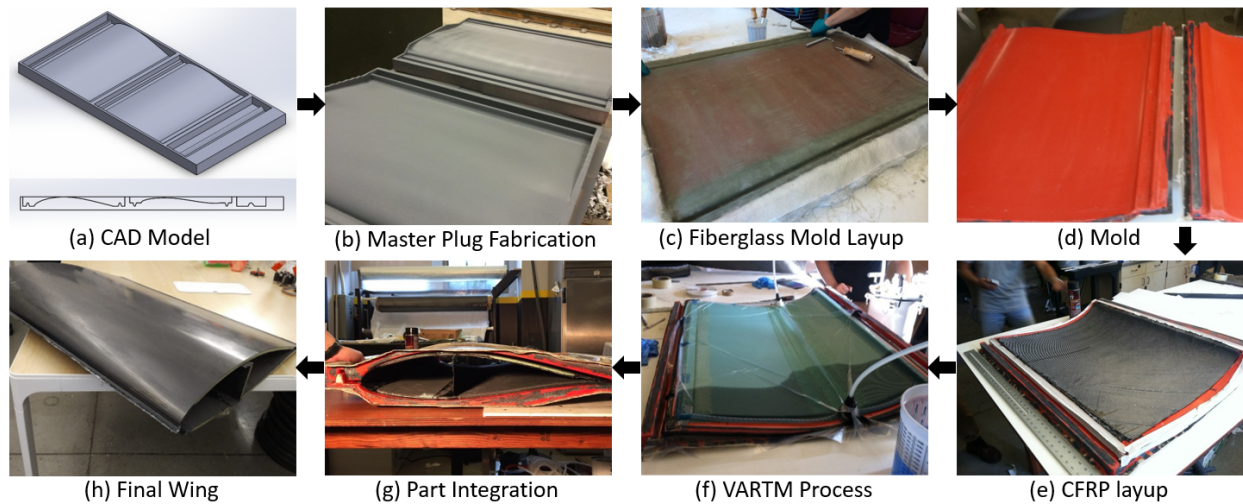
Wing manufacturing process, from design to lay-up and assembly. VARTM process is used for out-of-autoclave composite manufacturing purposes.
